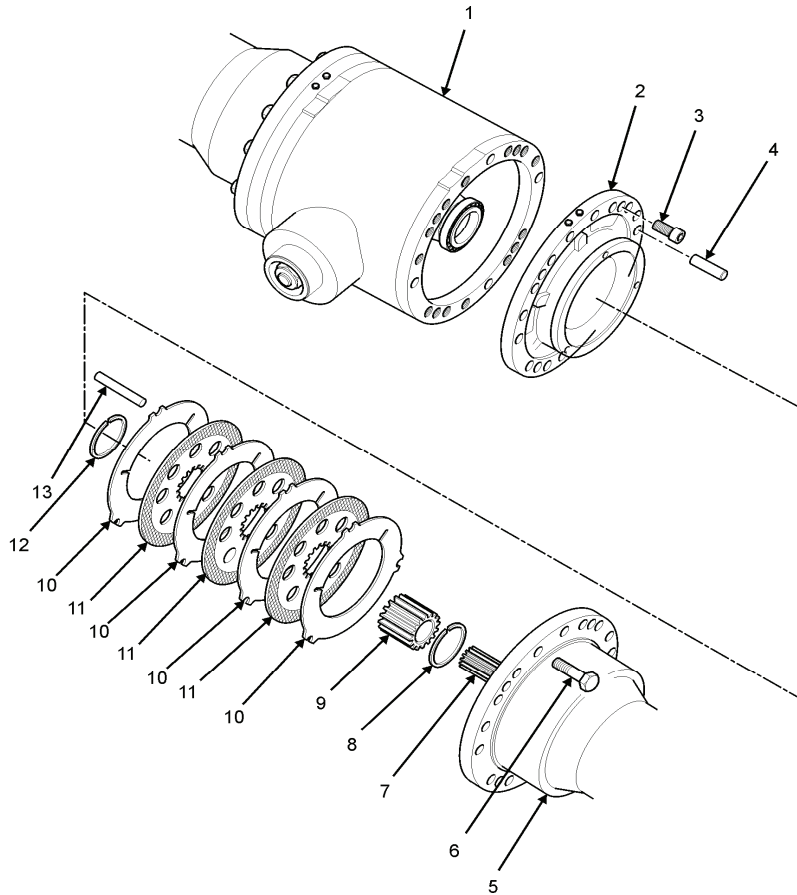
Rear Axle Friction Plates (Removal and Installation)
